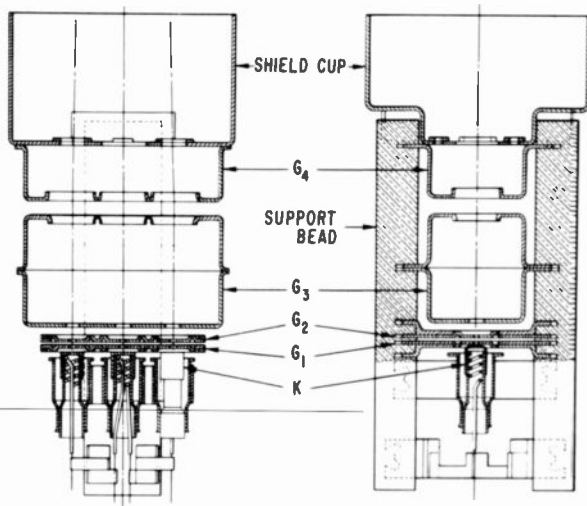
Line drawing of in-line gun with unitized construction (RCA).
